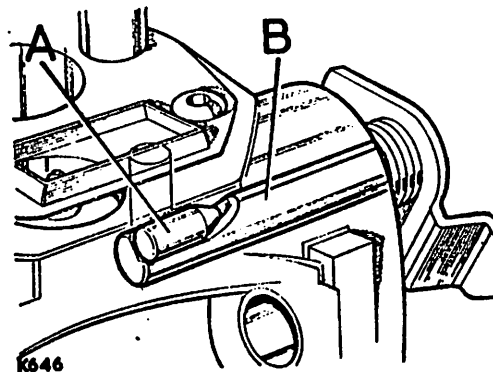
Hand brake tappet incorrectly engaged on hand brake lever
